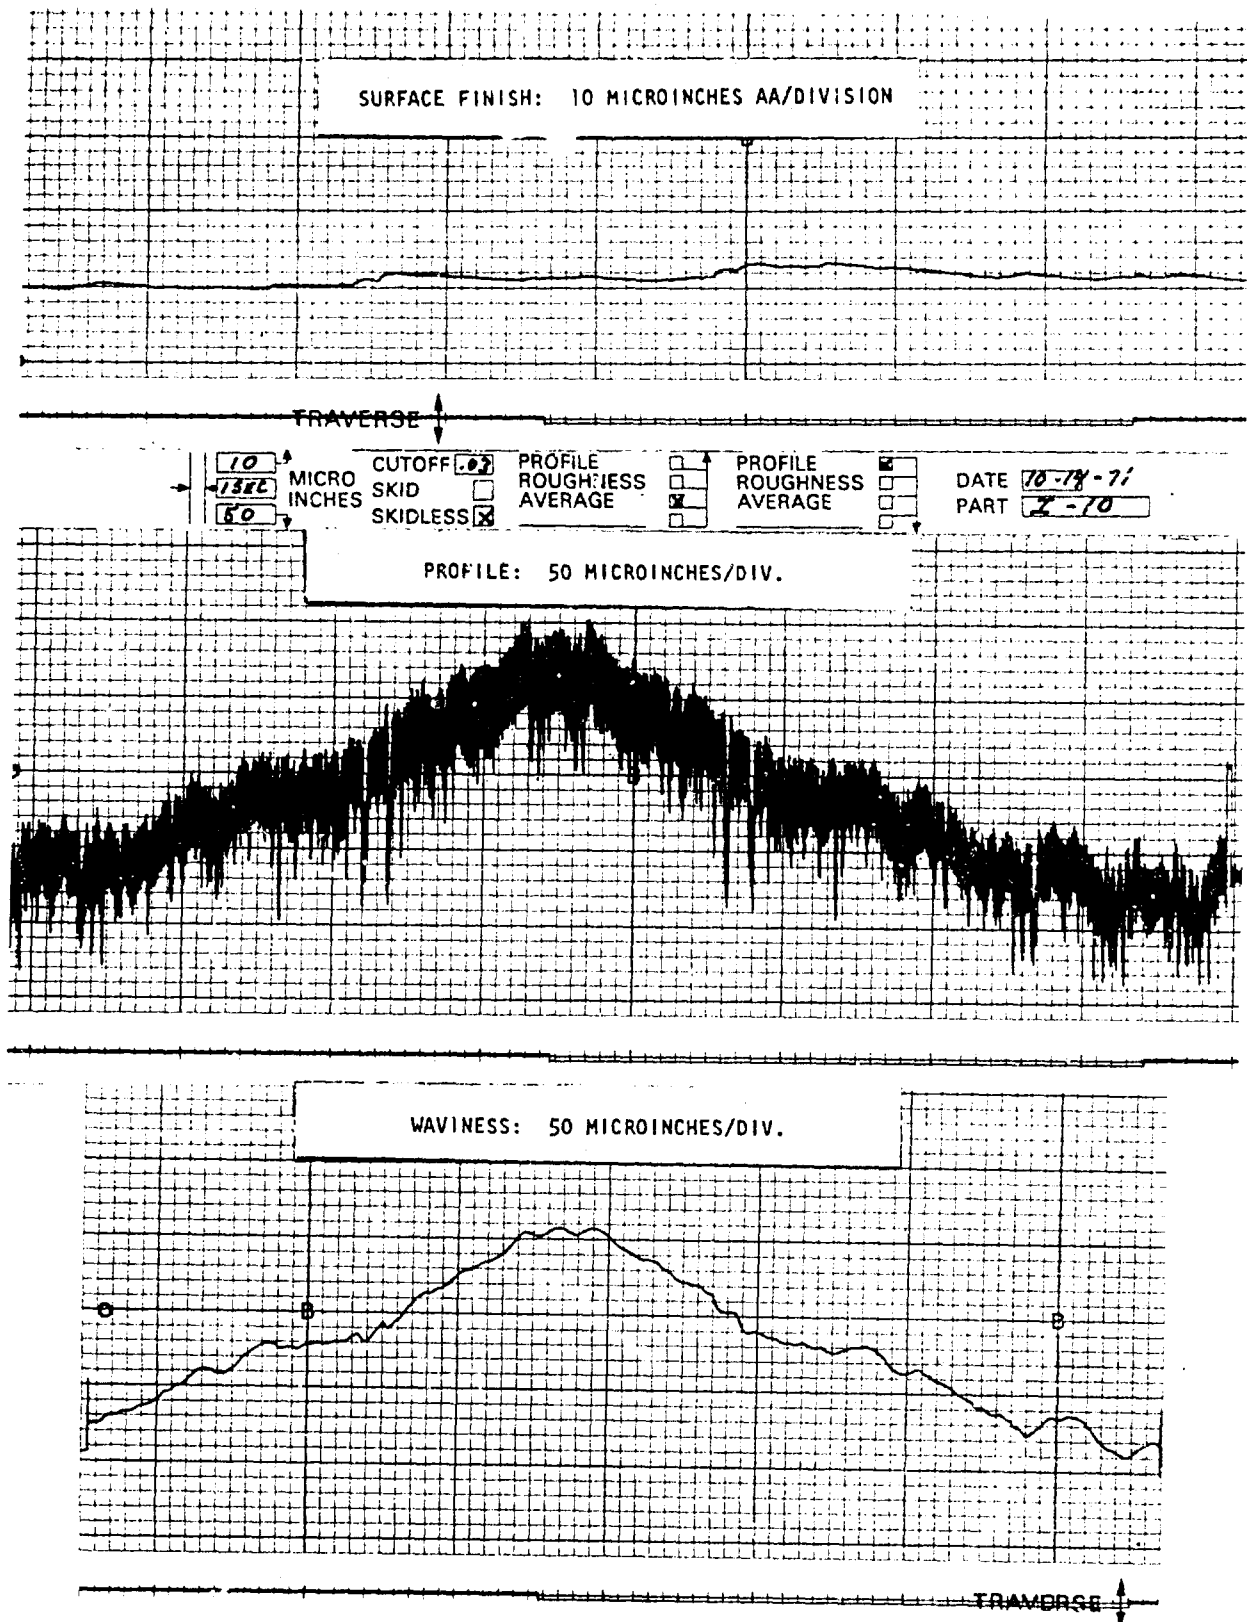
Profilometer traces showing profile, surface finish and waviness on gun drilled tube 1-10.
